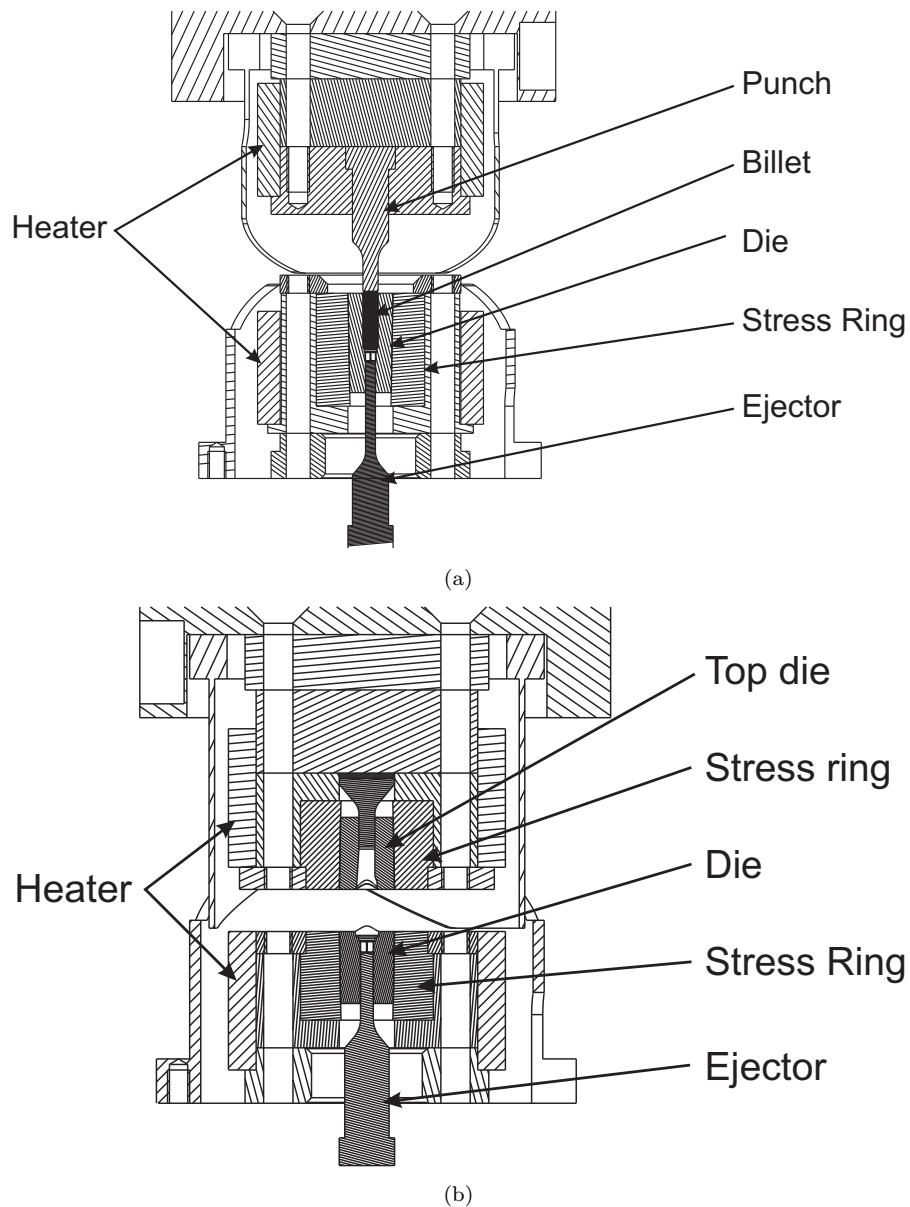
Sectional drawings of tool system for warm forging of titanium. (a) show the preform extrusion of the hex geometry and (b) depict the sectional drawing of the second forming step.
